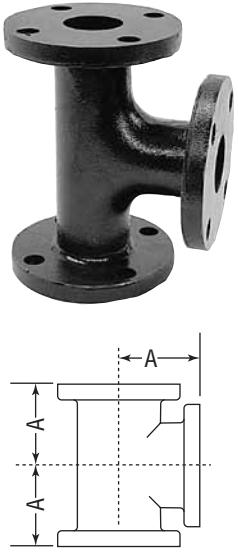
90° Flanged Side Outlet Elbow	Size	A	Flange Diameter	Thickness		Unit Weight
